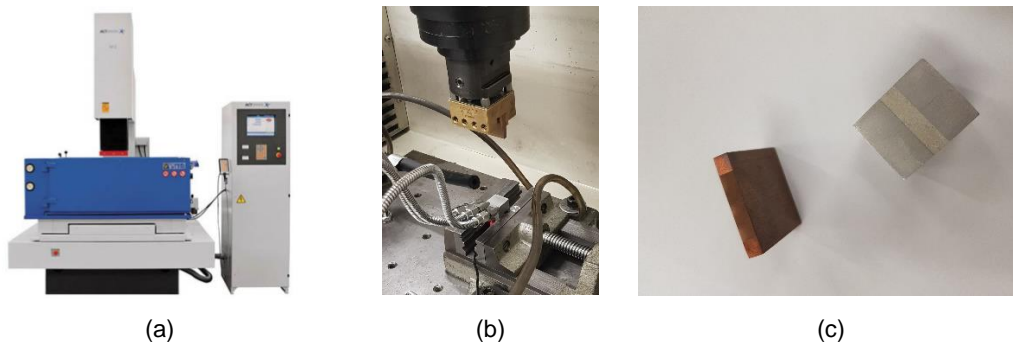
(a) Die-Sinker EDM Act Spark SP1; (b) Electrode and workpiece in their fixtures; (c) Proof Body.
